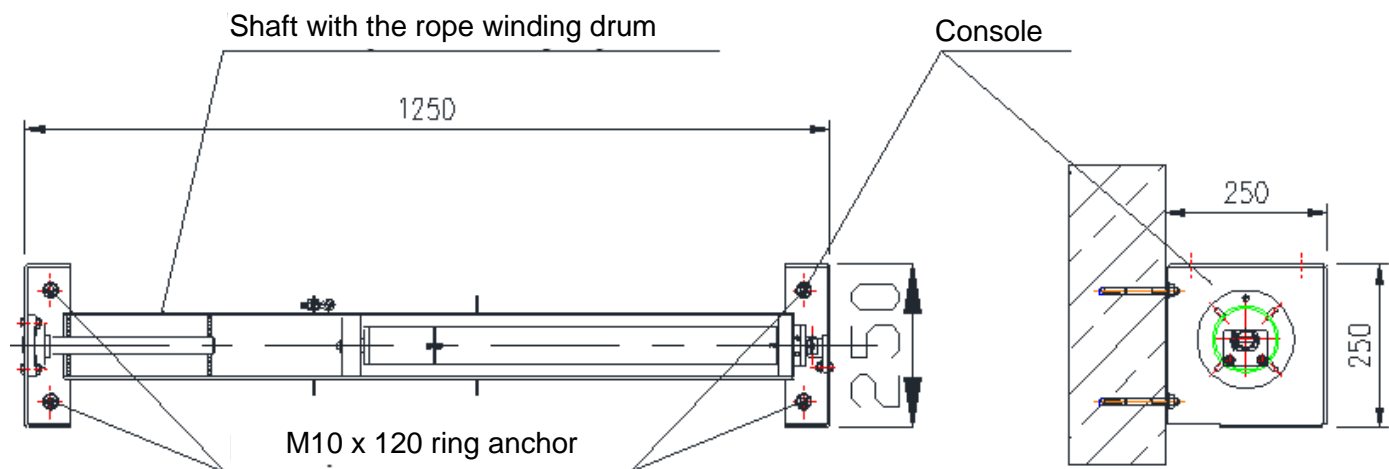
Installation of consoles supporting the shaft with the winding drum.
